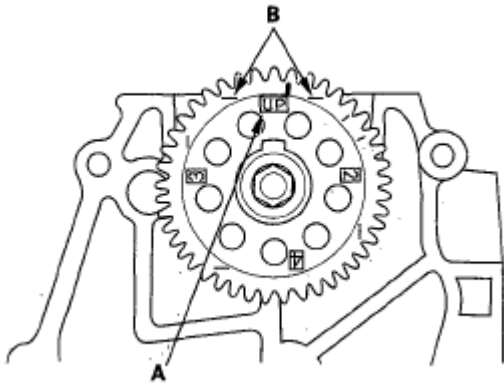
Locating UP Mark On Camshaft Sprocket Should Be At Top
